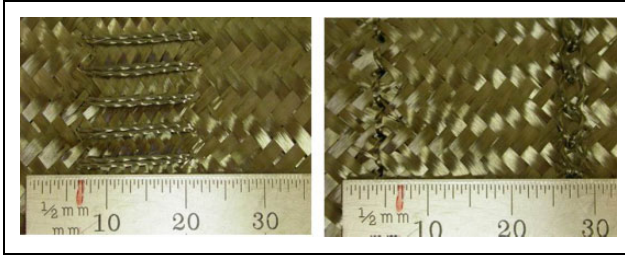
Face and rear views of one-sided stitch line used in twill carbon fibre stack 3.1 assembled using carbon fibre one-sided stitching.
